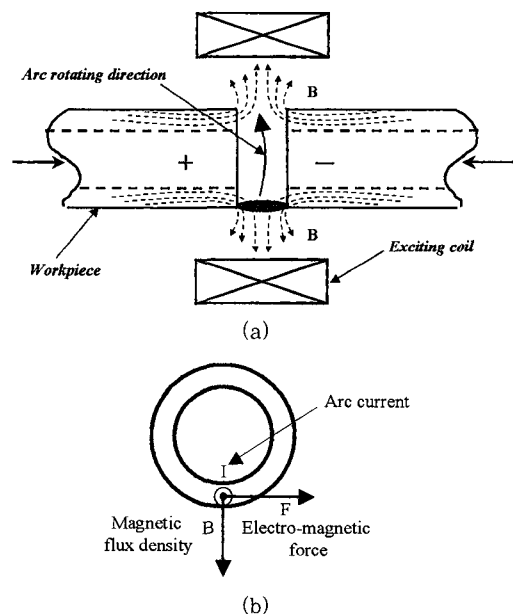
Schematic diagram of MIAB welding principle and Fleming's left hand rule
